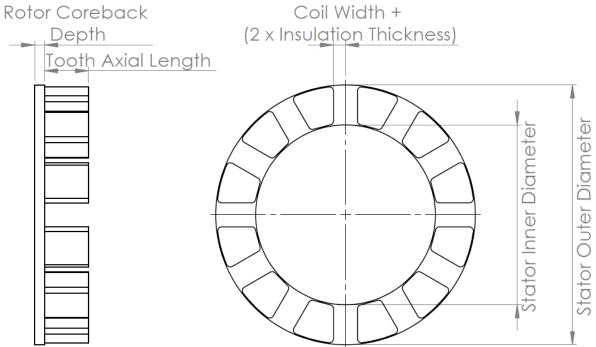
Illustration of the Major Machine Dimensions of a Double-Sided Axial Flux Machine
